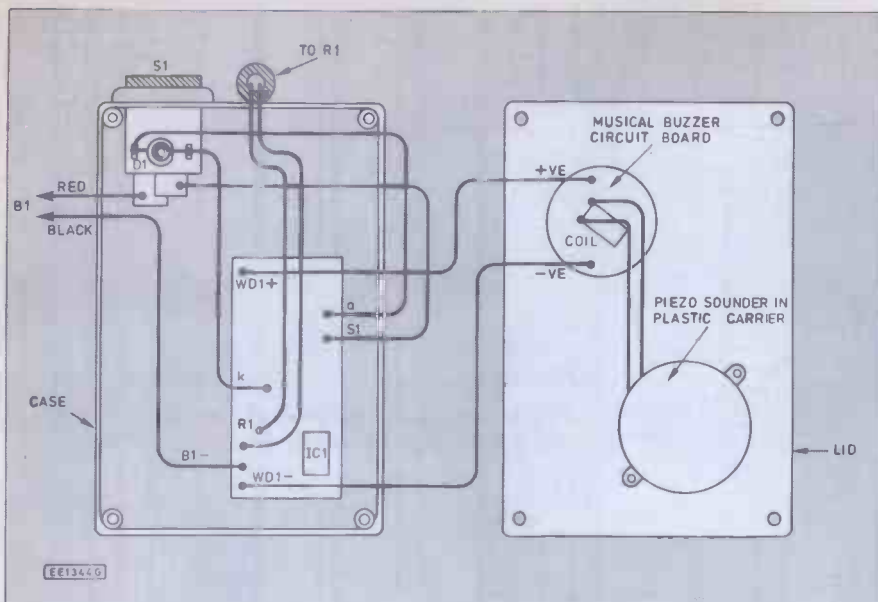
Complete interwiring details from the circuit board to the case mounted components.
